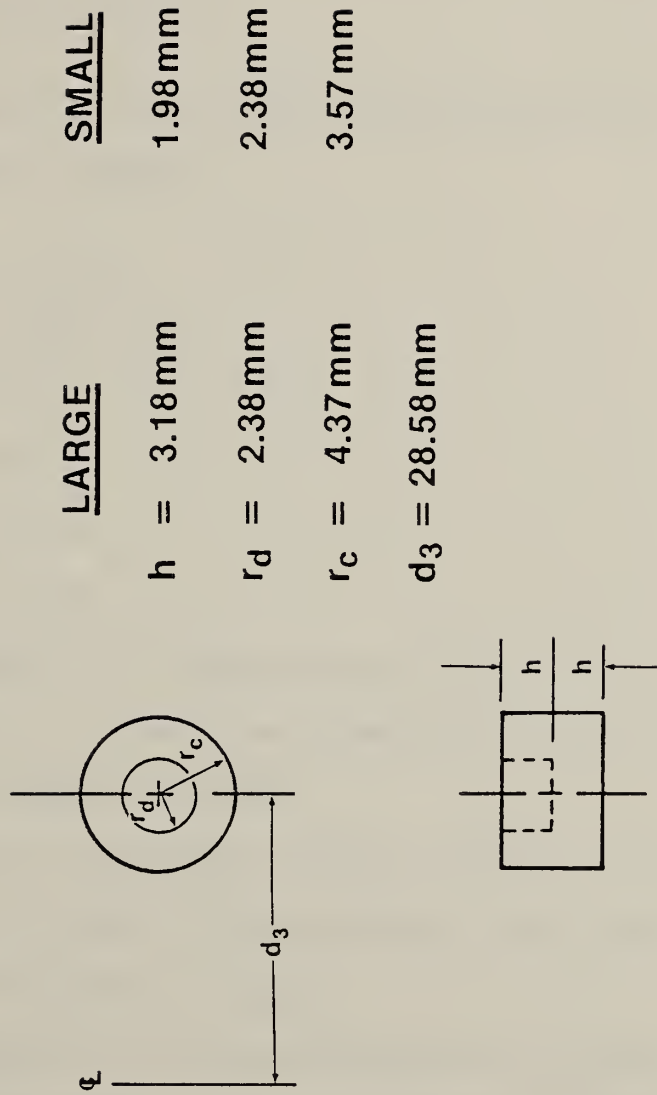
DIMENSIONS OF ALLEN SCREW HEADS.
